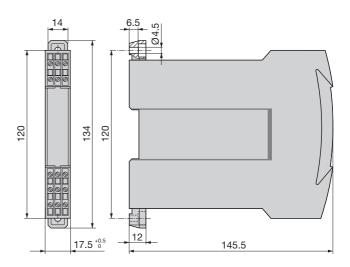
SINEAX C 402-1 in housing \$17, screw hole mounting brackets pulled out.
